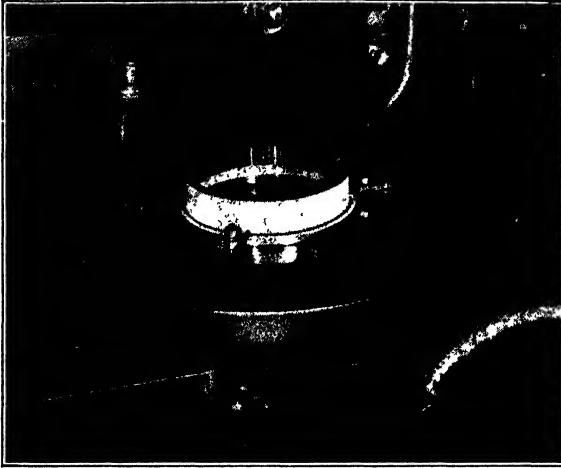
A gear shaper operation. (*Courtesy Machinery Magazine.*)
